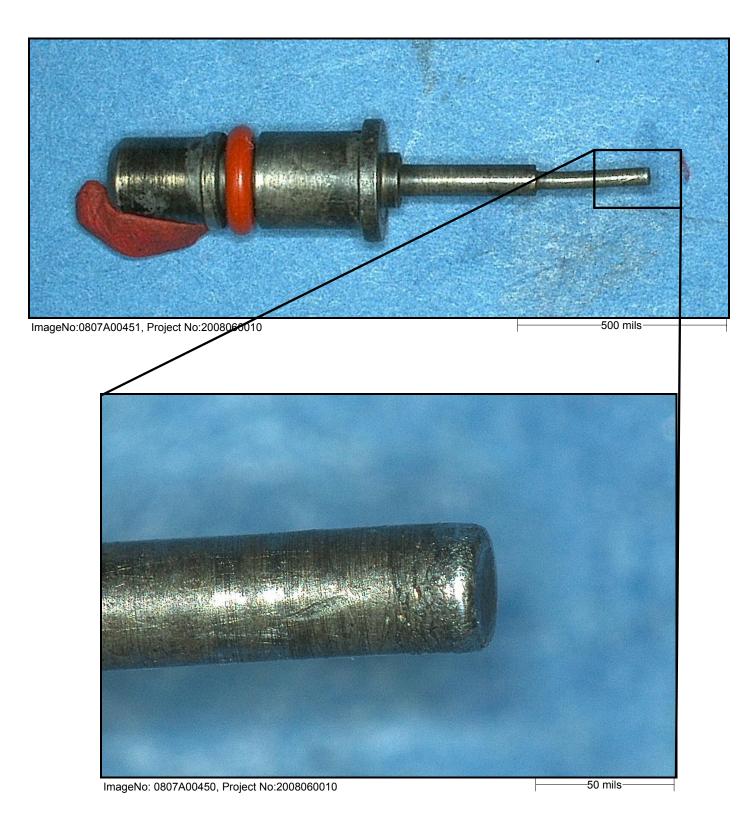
The bent push button pin with an enlargement showing the deformed and dented end.
